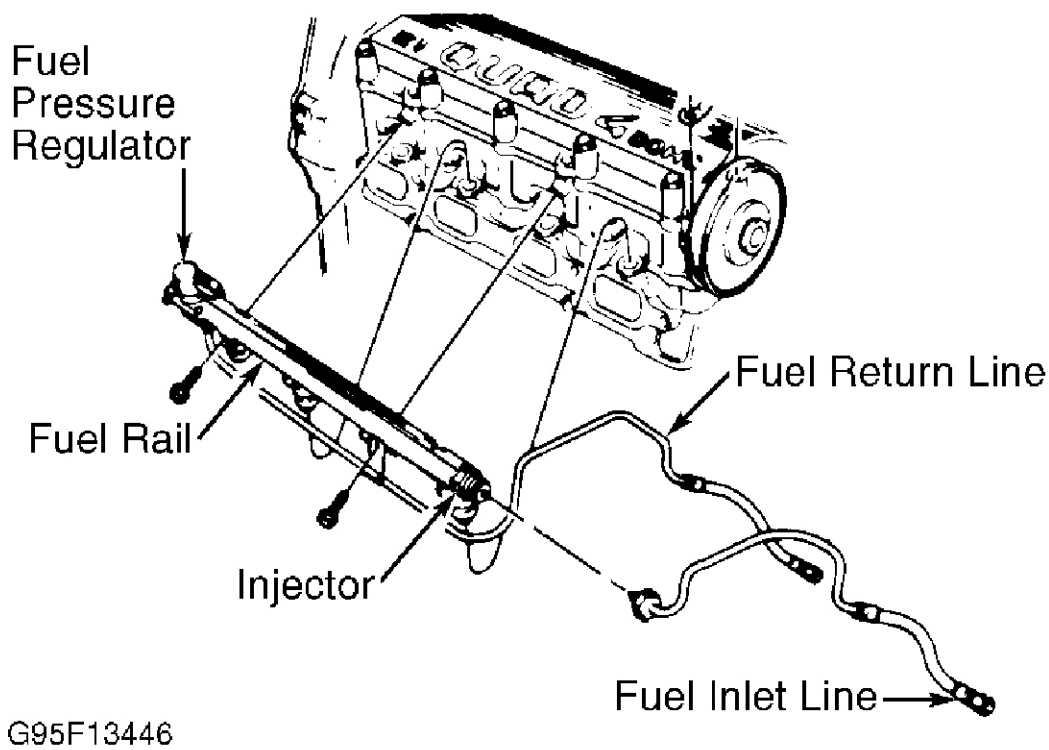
Locating Fuel Rail Assembly Components (2.4L - VIN T)
